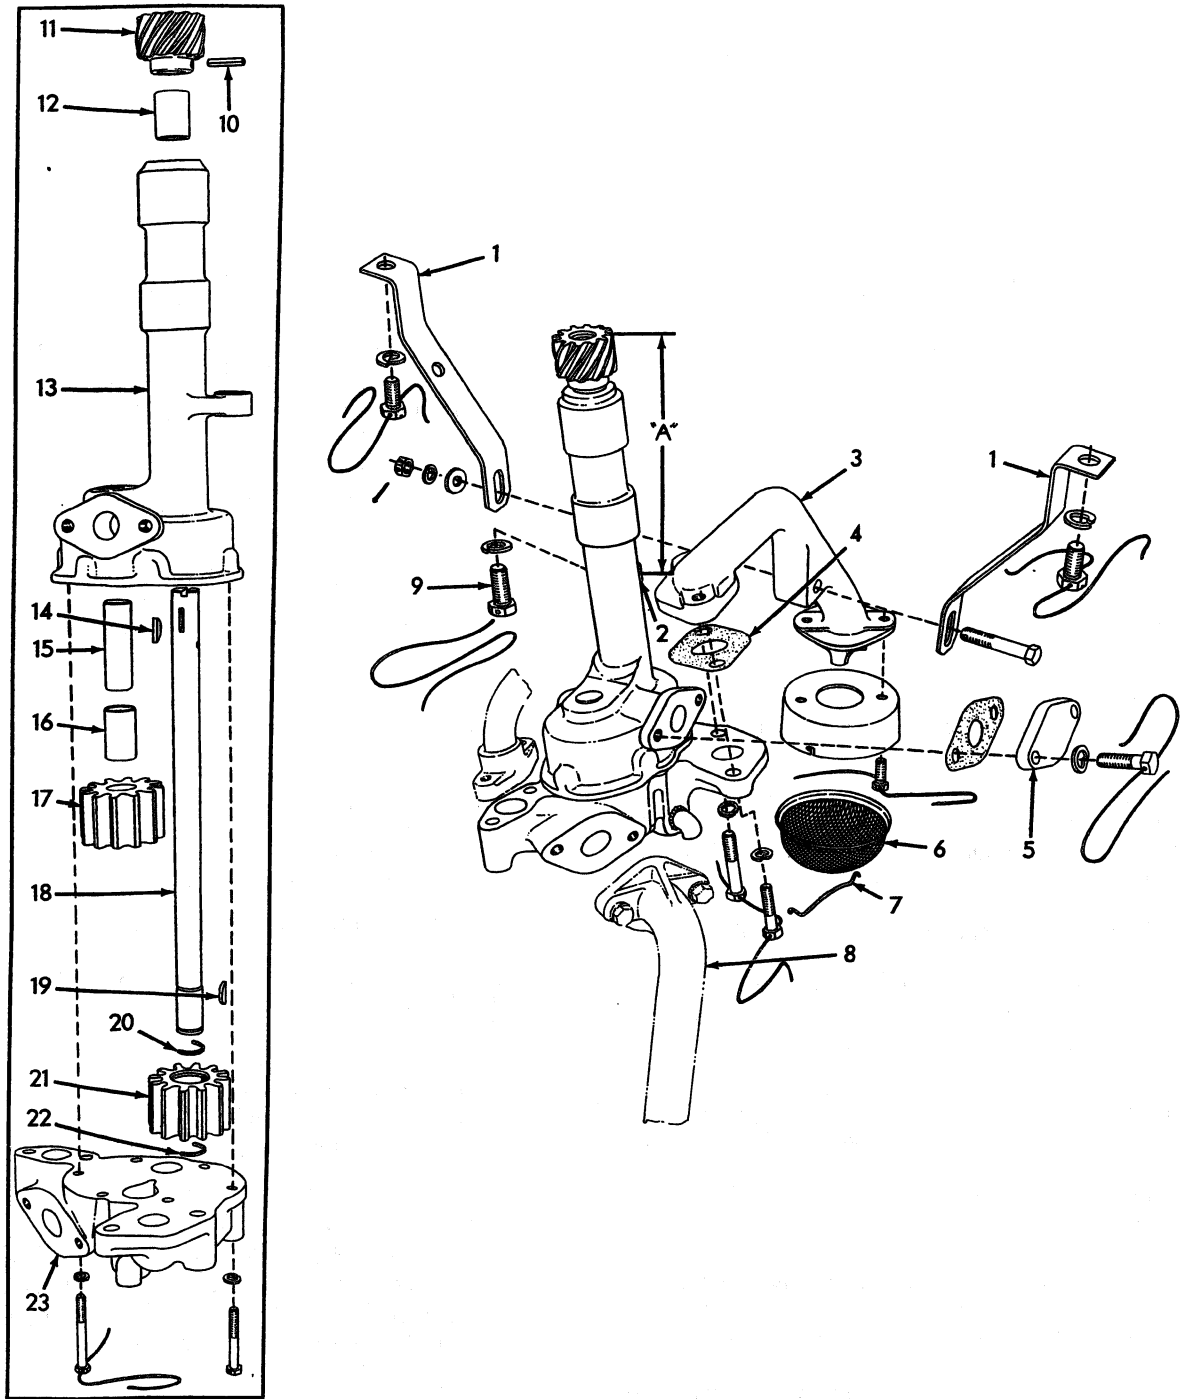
Scavenging Oil Pump Details (T-13980)
